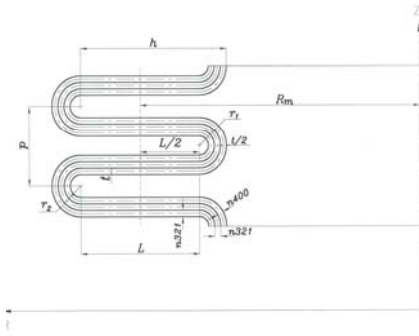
Geometrical Dimensions of Multiply Bellows
